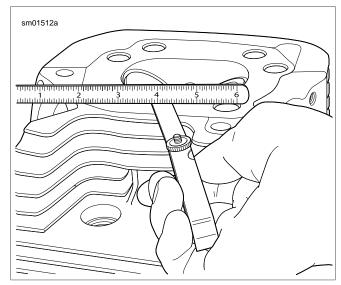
Gasket Surface: Flat Within 0.006 in (0.152 mm)
